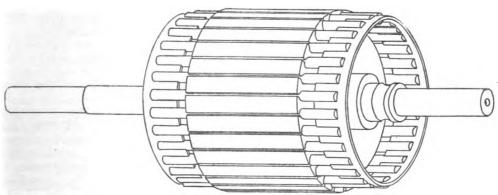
PERSPECTIVE VIEW OF A COMPLETED ROTOR OF THE SHORT-CIRCUITED OR "SQUIRREL-CAGE"
